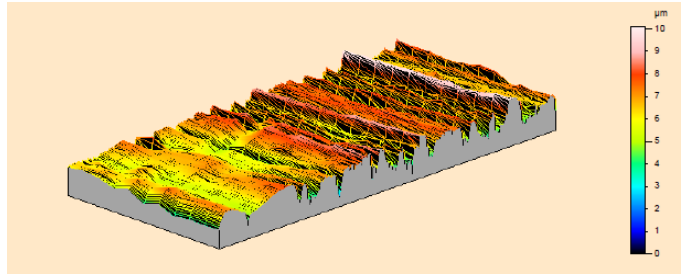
Bend-cleared dimensional figure of the surface of sample 1-20B after pressing (It is turned for 45° around vertical axes and for 30° against axes x and y).
